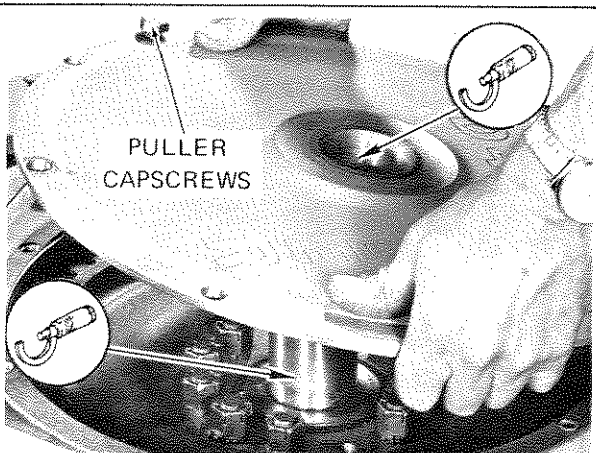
Removal And Disassembly of Brake And Bevel Gear Shaft Components (Sheet 4 of 4)
